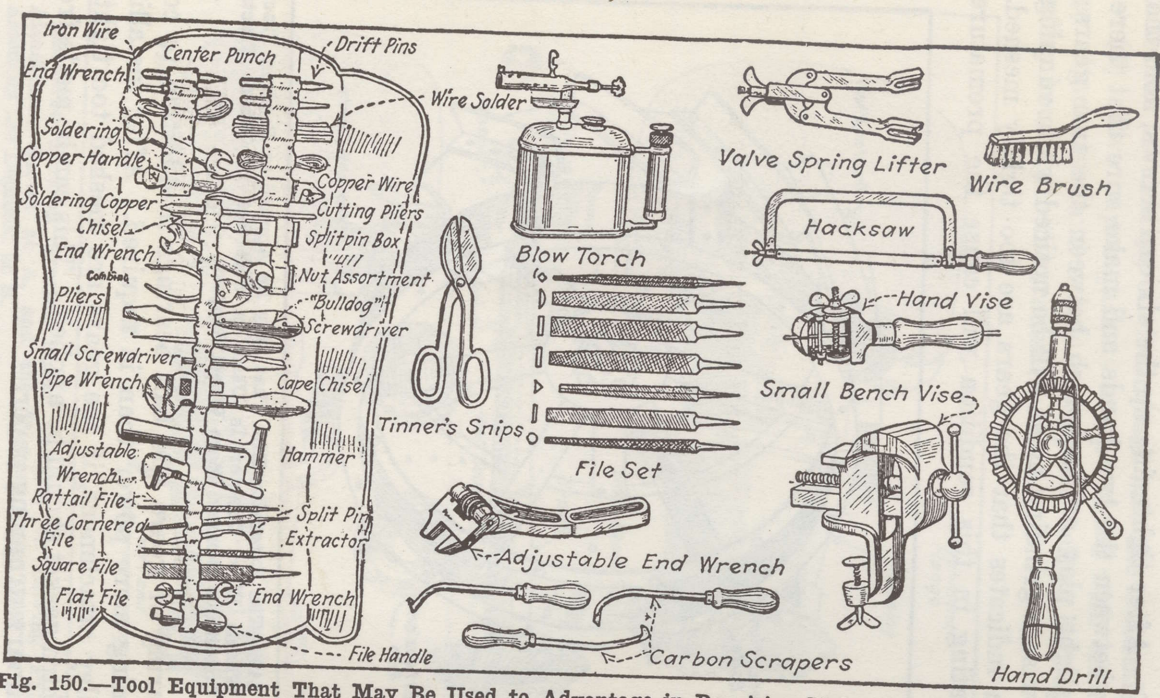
Tool Equipment That May Be Used to Advantage in Repairing Either Automobiles or Tractors.
